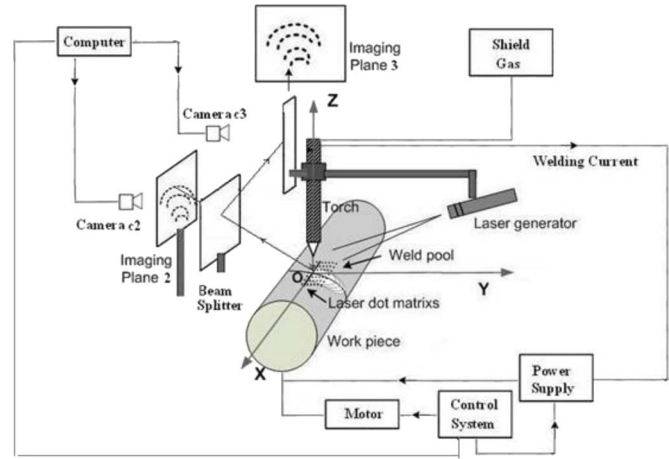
Diagram of the closed-loop welding robot system.
